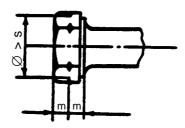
Examples of marking for cylinder-head socket head screws with hexagon or six-lobe slot
